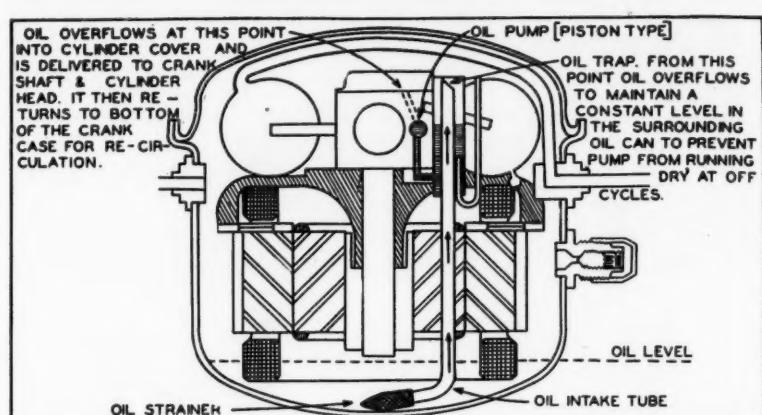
Sectional details of the Crosley compressor. The lubricating system designed by Crosley is most positive and dependable in its assurance of protection of the compressor parts; it also assures against the pump running dry.
